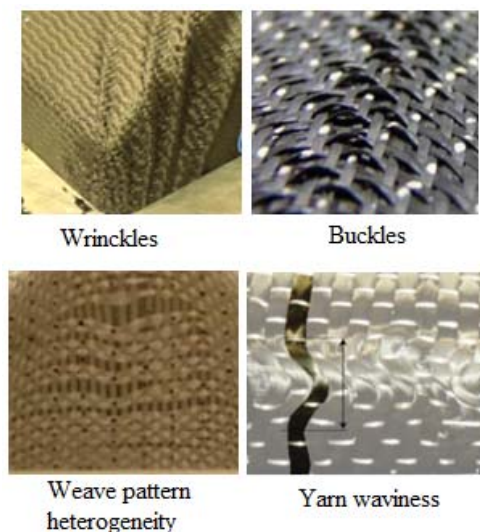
Shaping defects: Macroscopic (wrinkles) and Mesoscopic
